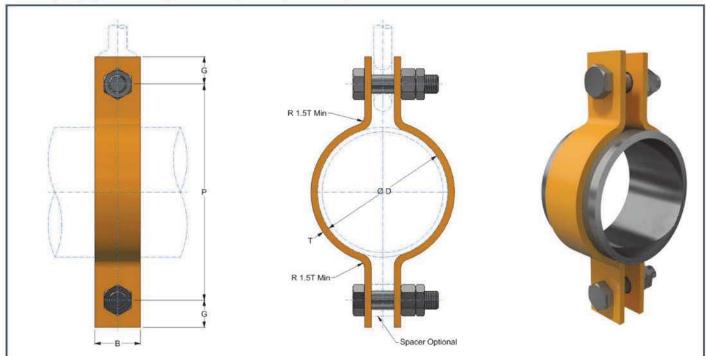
Dimensions of pipe clamps are for steel pipes (Range A: -20°C to 100°C
